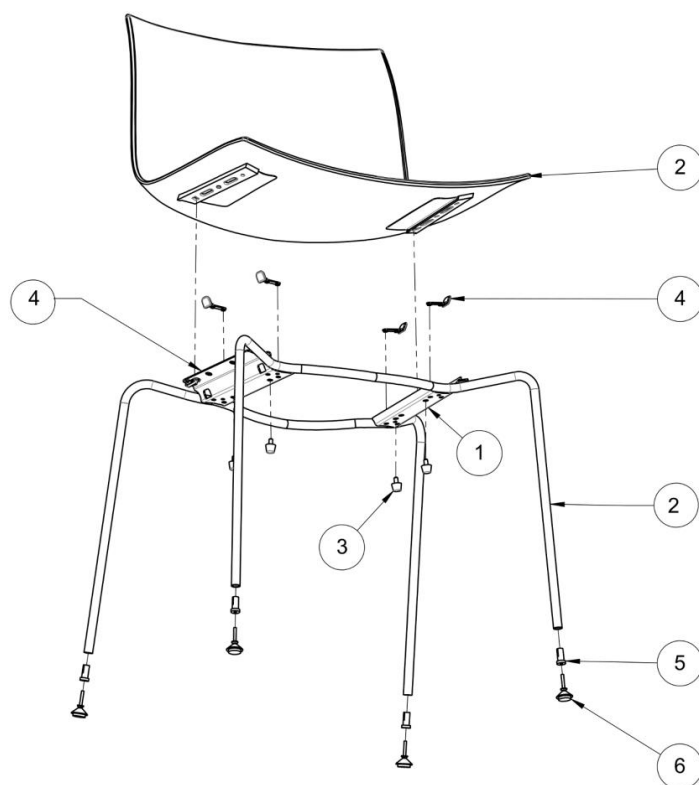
Exploded view of Catifa 46 chair with 4-legs base. 1) PP shell; 2) 4-Legs base; 3) Trays; 4) "Clip It Easy"; 5) Hole cover; 6) Leg cap.
